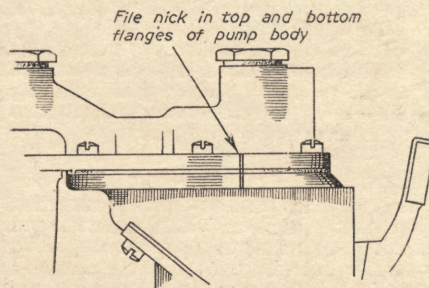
Before disassembling the pump, a file nick should be made across the upper and lower flanges to ensure correct location upon reassembly.
